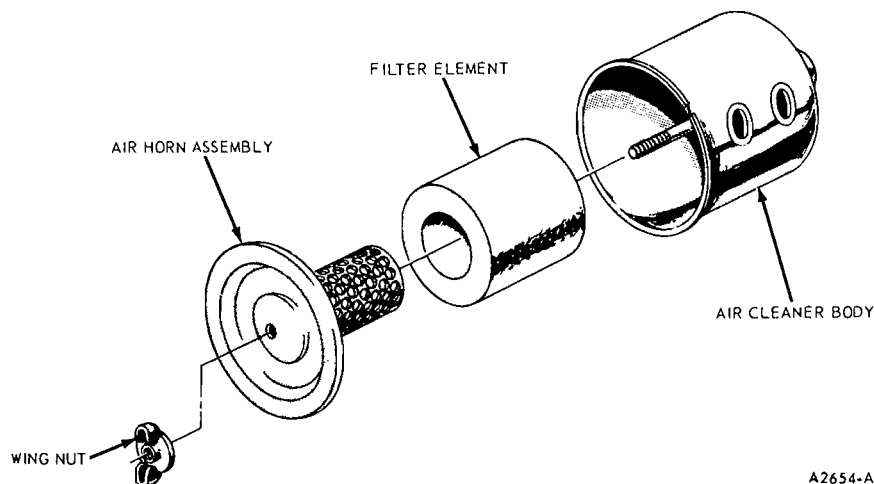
Thermactor Exhaust Emission System Air Cleaner
